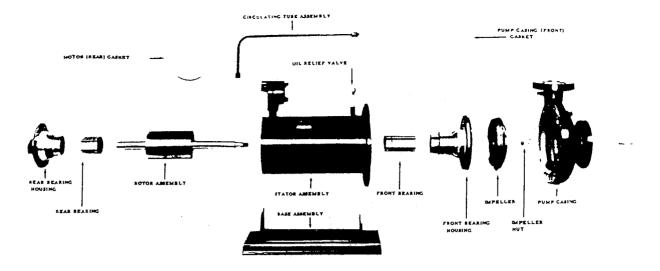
Exploded View Models GA, GB, GC, GD, GE, GG, GVM, GVBS, GVD, GVE, GVH(S)
